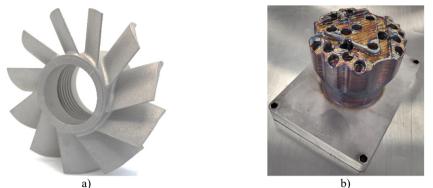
a) Proof of concept parts manufactured by HH Industries/RTI, NNPC Limited, inconel drill rig stator, b) steel drill Bit without tungsten carbide buttons [14]
